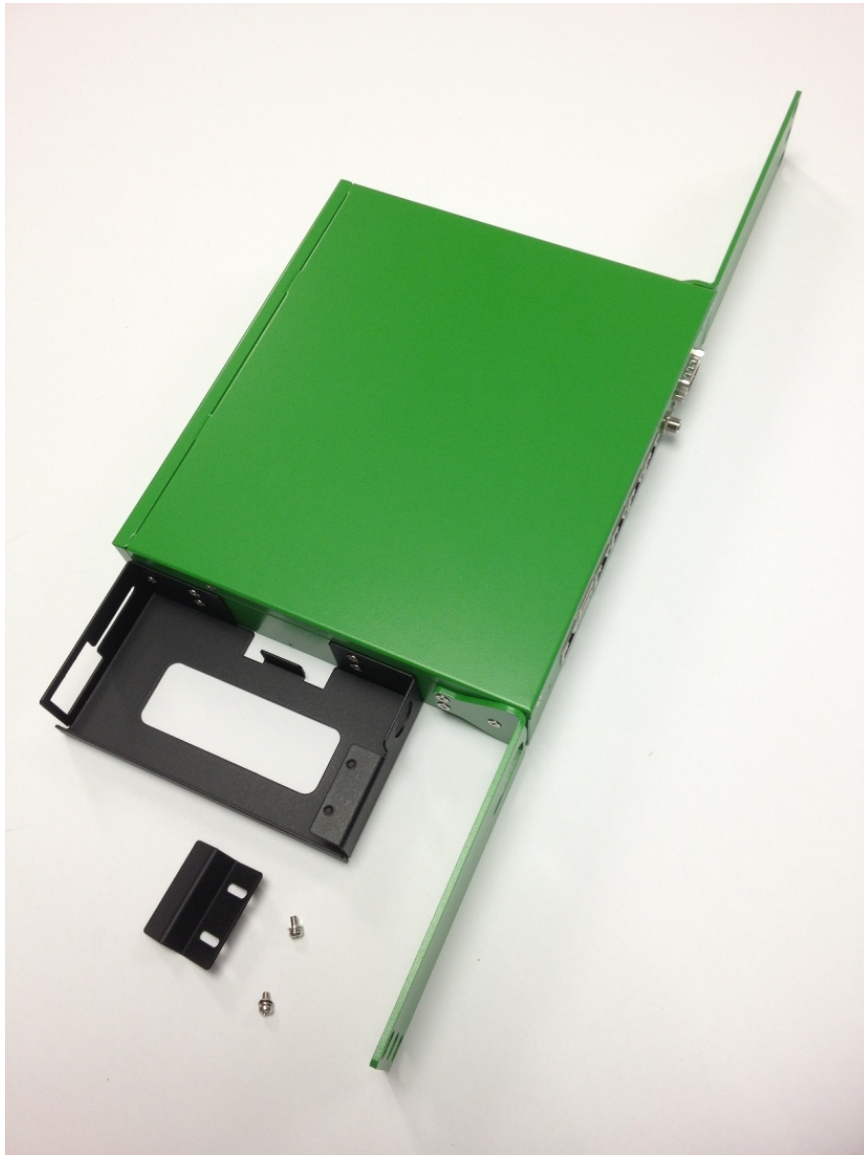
AG 2400 power supply mounting bracket and retaining clip
